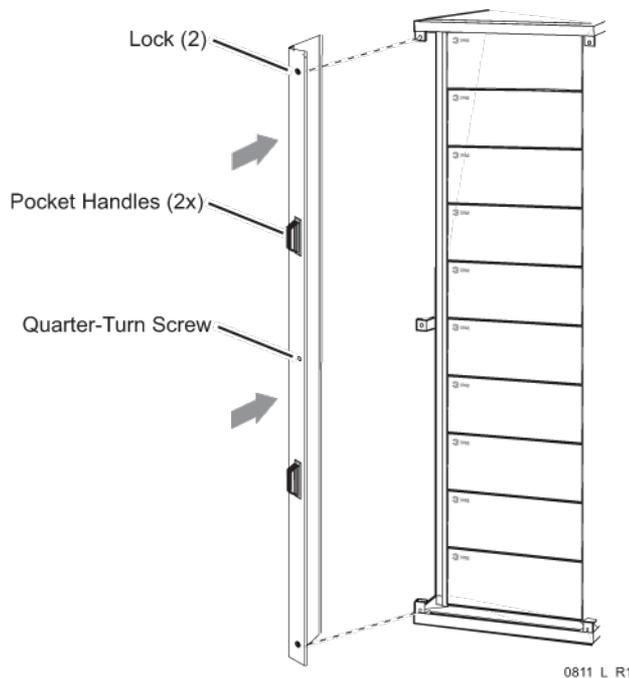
Installing Universal Cosmetic/Mounting Brackets
